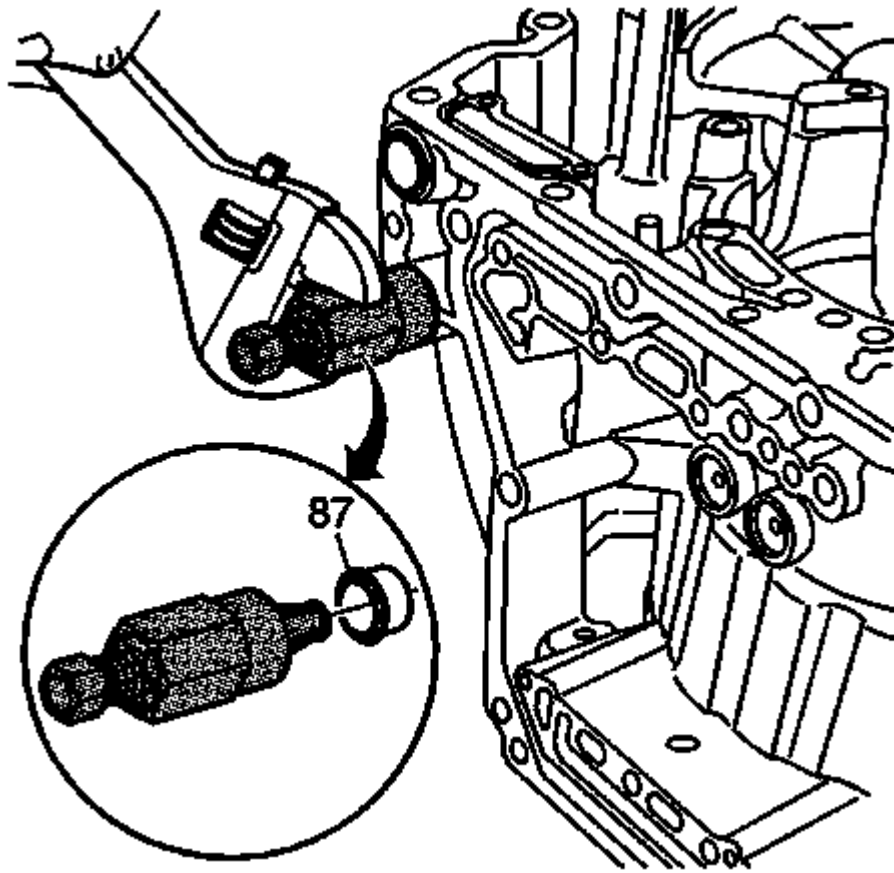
Removing Fluid Cooler Pipe Fitting Seal
